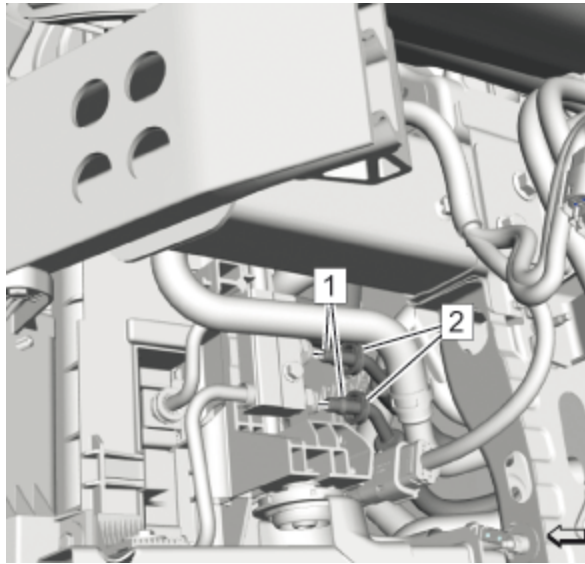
Transmission Fluid Cooler Pipe Connector Cap
